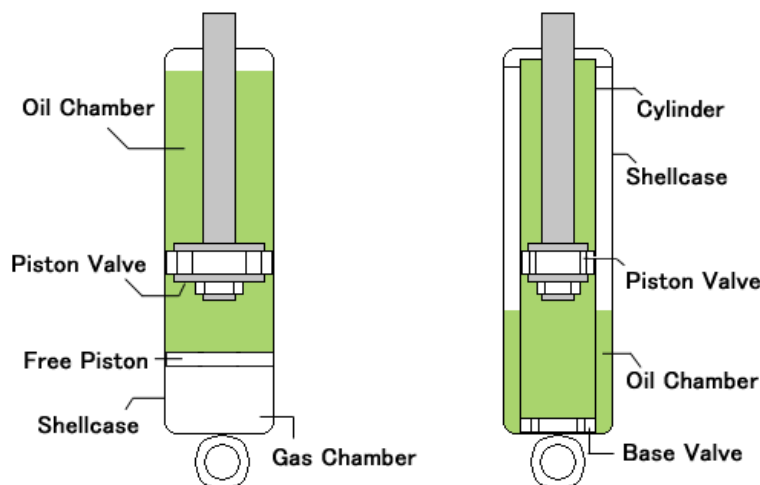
PASSIVE HYDRAULIC DAMPERS, SINGLE TUBE AND TWIN-TUBE SHOCK
